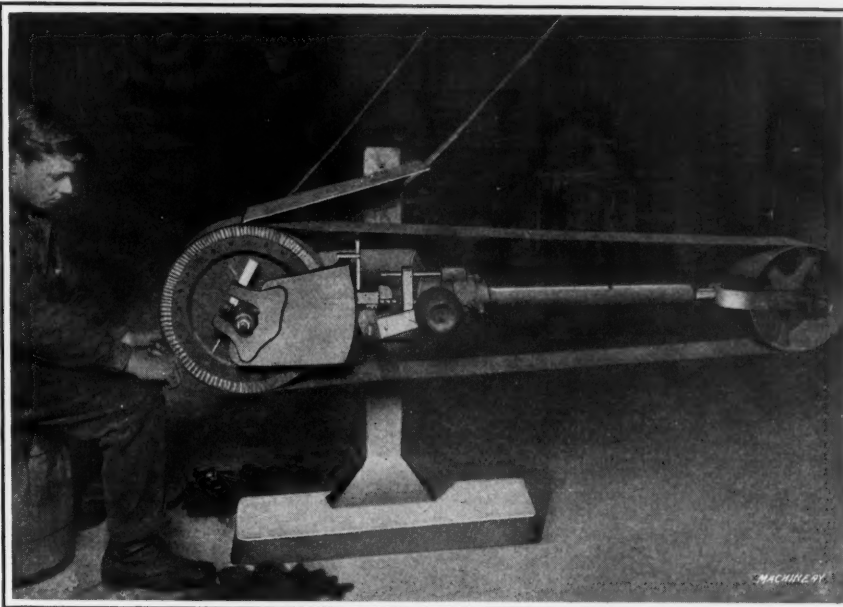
Abrasive Belt Type of Polishing Machine with a Leather Wheel to support the Polishing Belt
